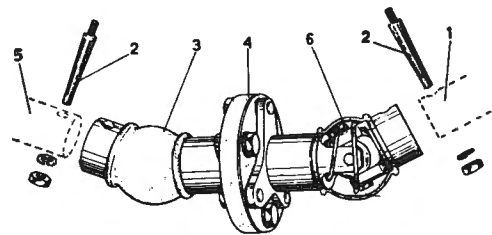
Gear-shift shaft universal joint, LHD models.
